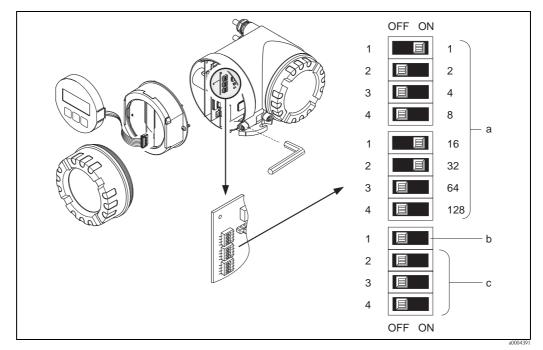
Addressing with the aid of miniature switches on the I/O board
